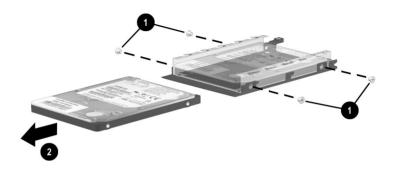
Removing the Hard Drive from the Hard Drive Bezel
